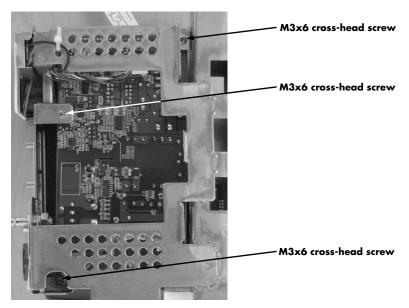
Remove three (3) M3x6 cross-head screws.
